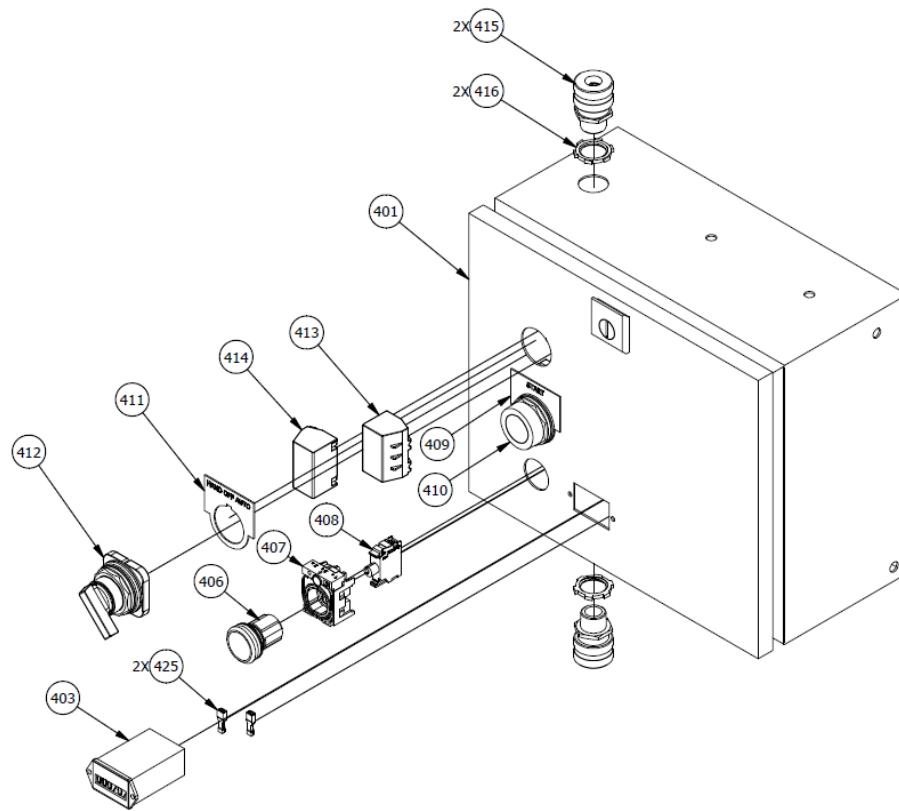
CONTROL BOX DETAIL, 1 OF 2
